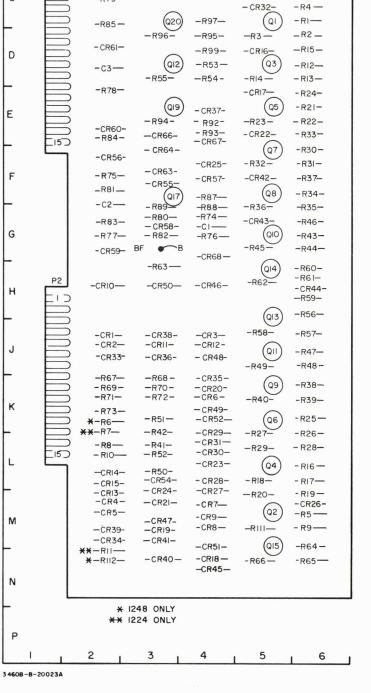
N₂ and N₁ RCD/D-to-A Coil Drive; Assembly A35 (1-2-4-8)
